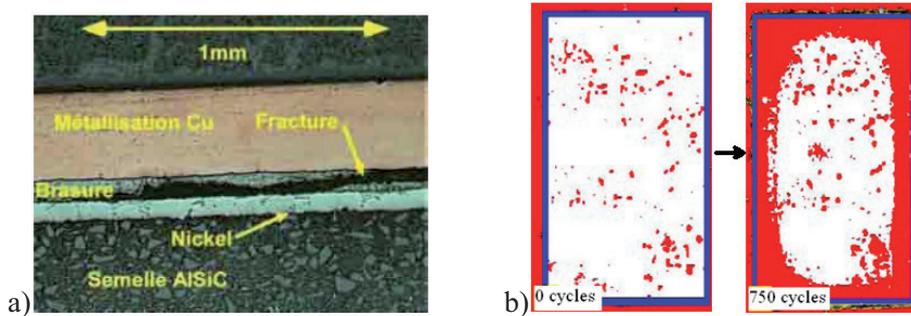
Base plates solder fatigue fracture (a) [4], and delamination progression (b) [5].
